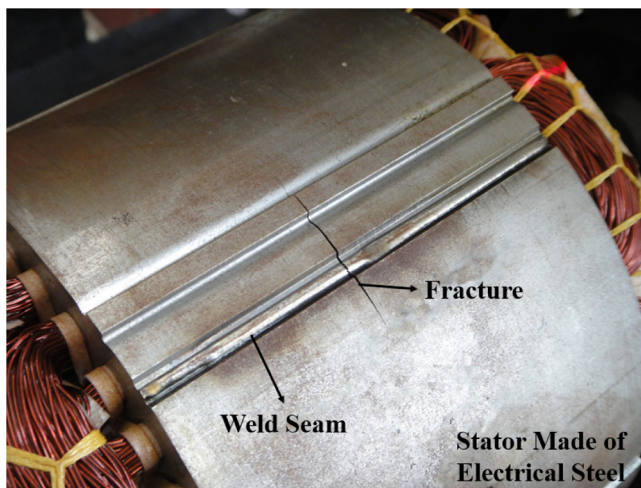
Fracture in the weld seam zone of the welded stator.
